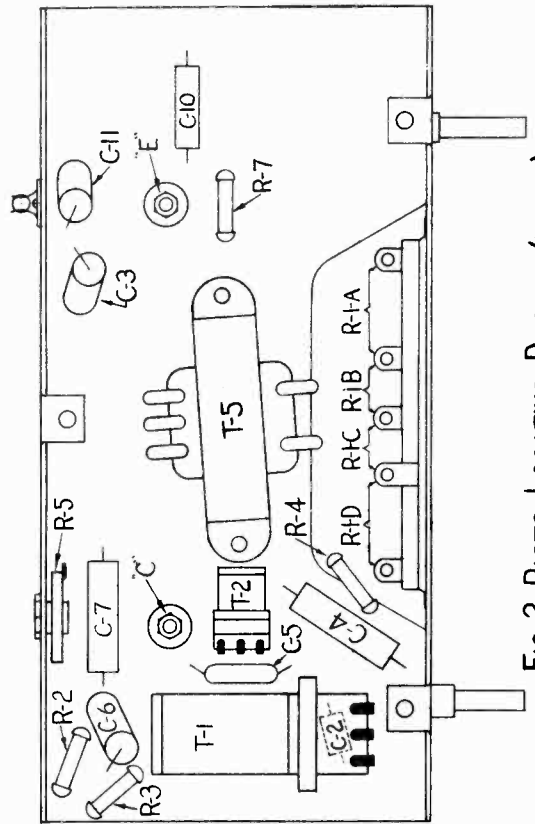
PARTS LOCATING DIAGRAM (BOTTOM)
